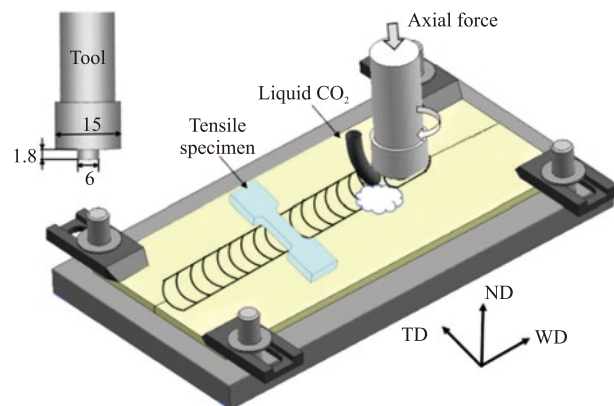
Schematic of the RCFSW process and welding tool
